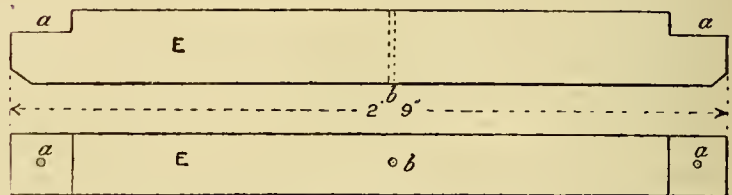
LONGITUDINAL PIECES FOR TYING FRAMING AT TOP, AND FOR CARRYING SUPPORT FOR SAW SPINDLE.
